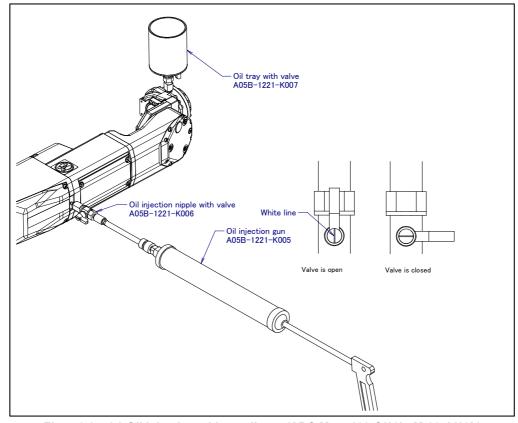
(c) Oil injection with an oil gun (ARC Mate 120iC/10L, M-20iA/10L)
